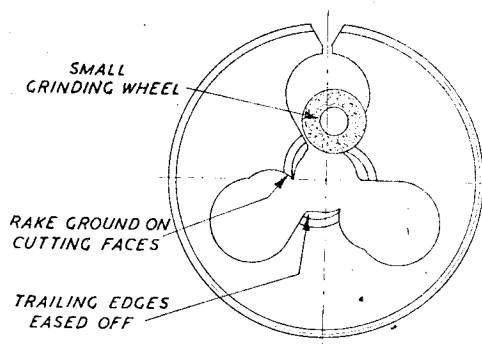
Showing how cutting faces of die may be ground to produce "top rake" by means of a tiny rotary grinding wheel. (Rake exaggerated.)
